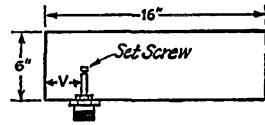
Wave-guide feed for 1296-MHz. dish recommended by W2CCY. The cylinder, shown in cross section, is 6-inch-diameter copper or brass. The probe is 2 inches high, of 1/4-inch rod or tubing, with a screw threaded into the top end. Dimension V, also approximately 2 inches, and the probe length should be adjusted for best s.w.r.
